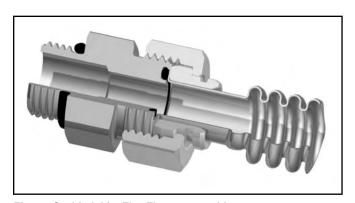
Seal-Lok Lite Flex Flange assembly.
